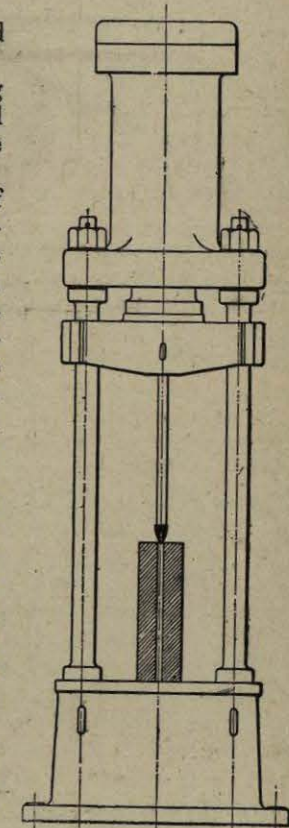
Press for Piercing Billets to form Weldless Tubes.
